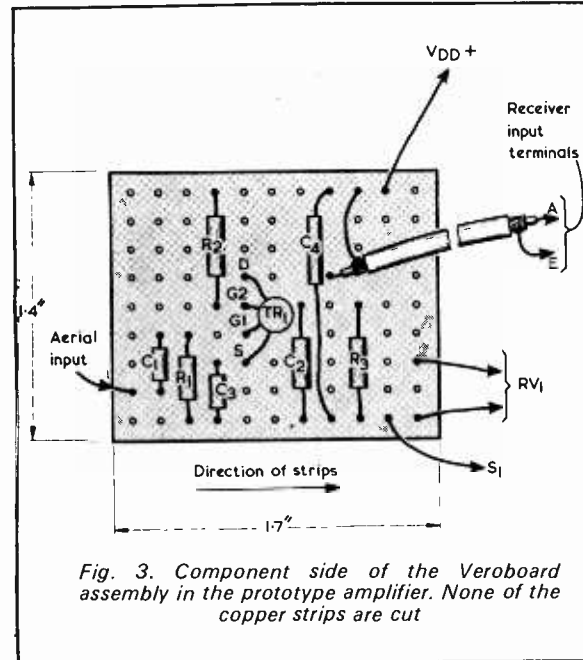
Component side of the Veroboard assembly in the prototype amplifier. None of the copper strips are cut
